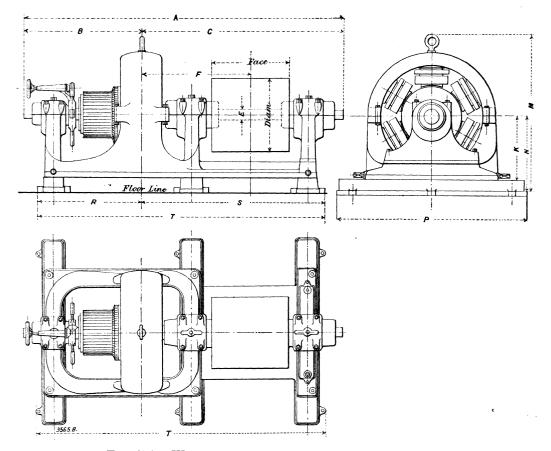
Westinghouse 3-Bearing Railway Generator.
